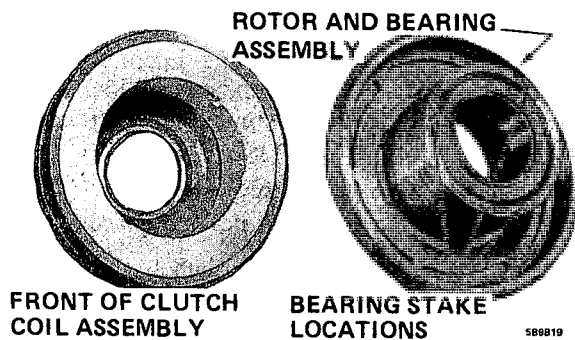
B-43 - Bearing Stake Locations - 4 Cylinder Compressor
